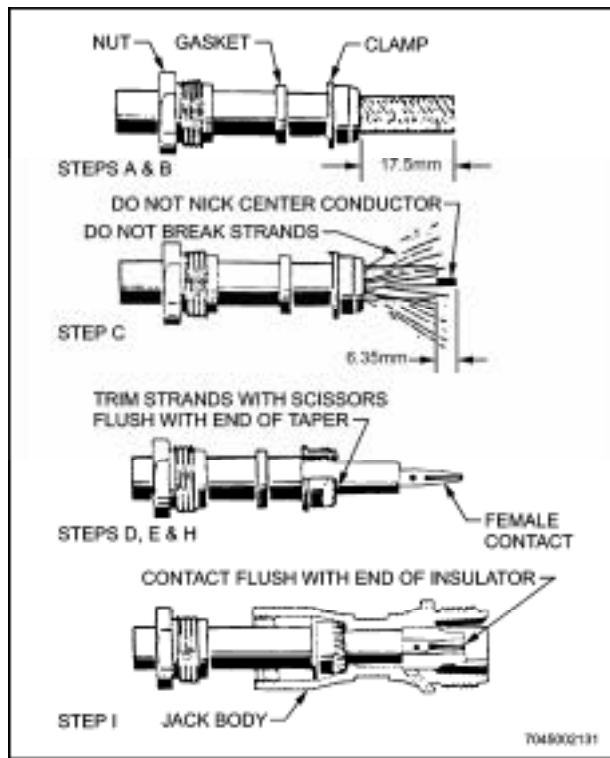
Attaching Improved HN Connectors to Coaxial Cable
